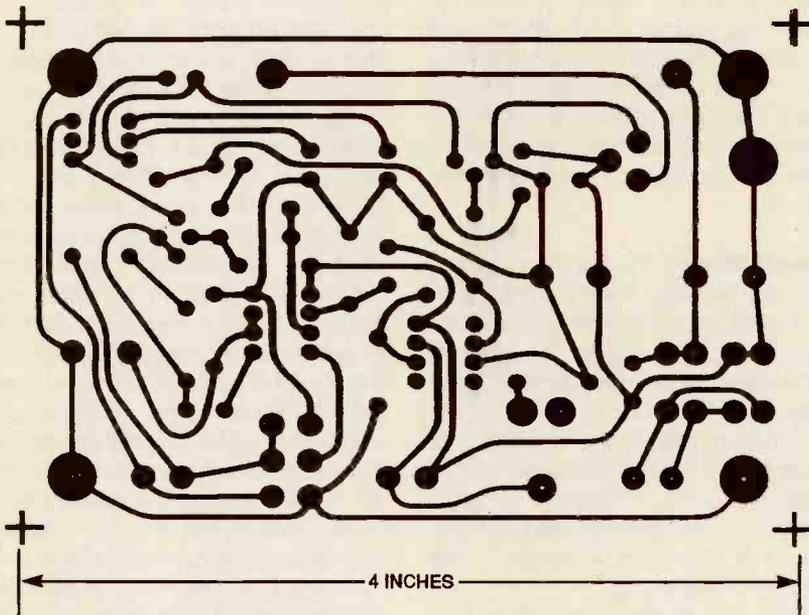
The Sprinkler Guardian prototype was assembled on a printed-circuit board. A full-size template of it is shown here.
